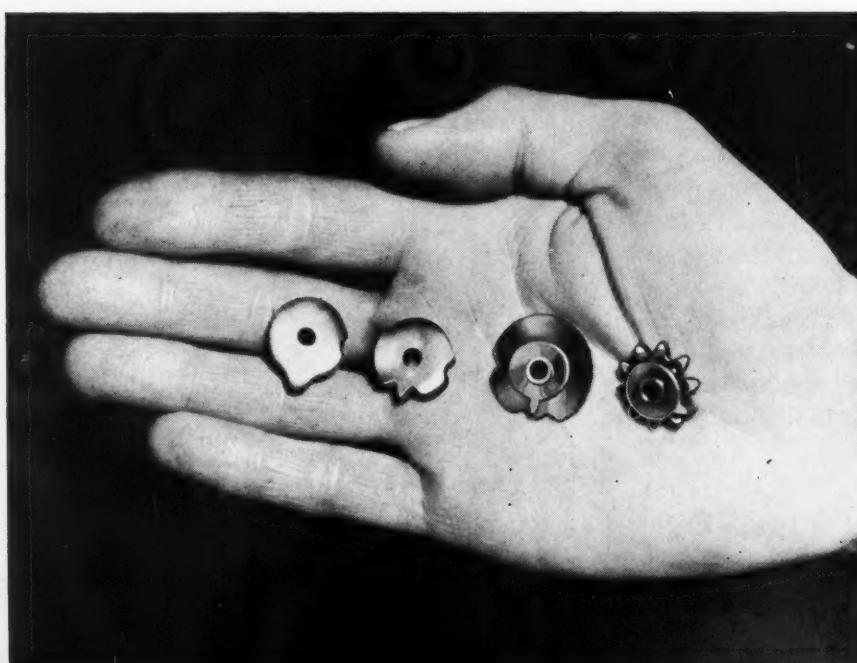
Some of the progressive steps in the production of ten-tooth gears, having a pitch diameter of 0.664 inch, from steel strip stock 0.207 inch thick
